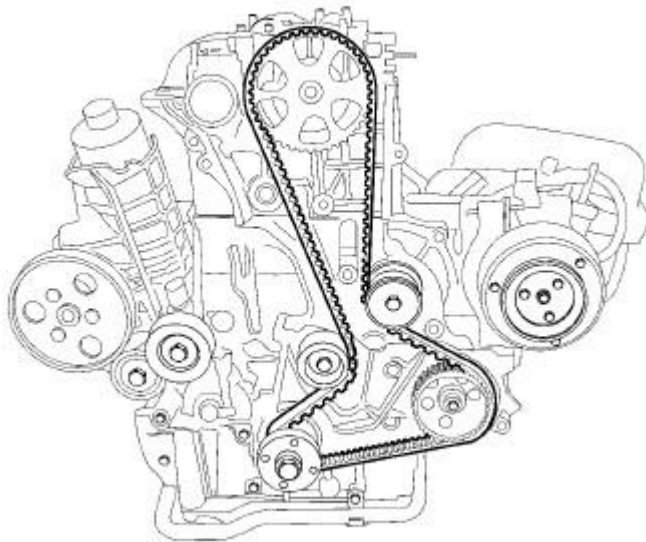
CRANKSHAFT TIMING BELT SPROCKET
